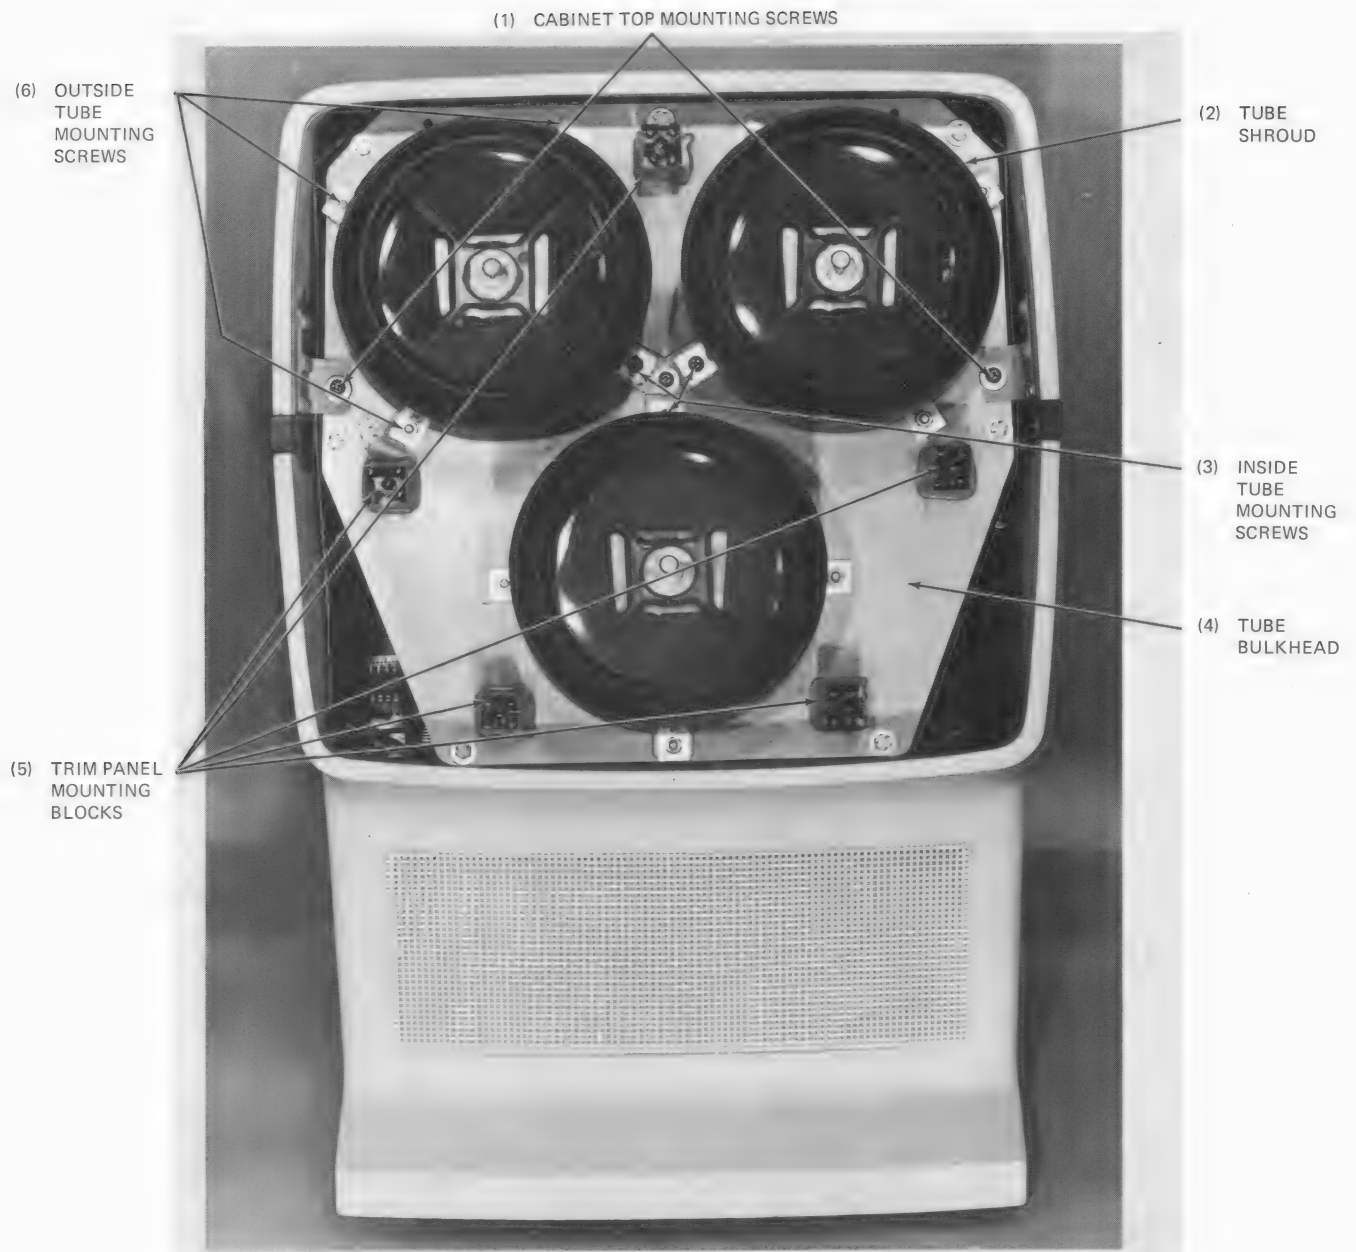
FRONT VIEW WITH FACE TRIM REMOVED
